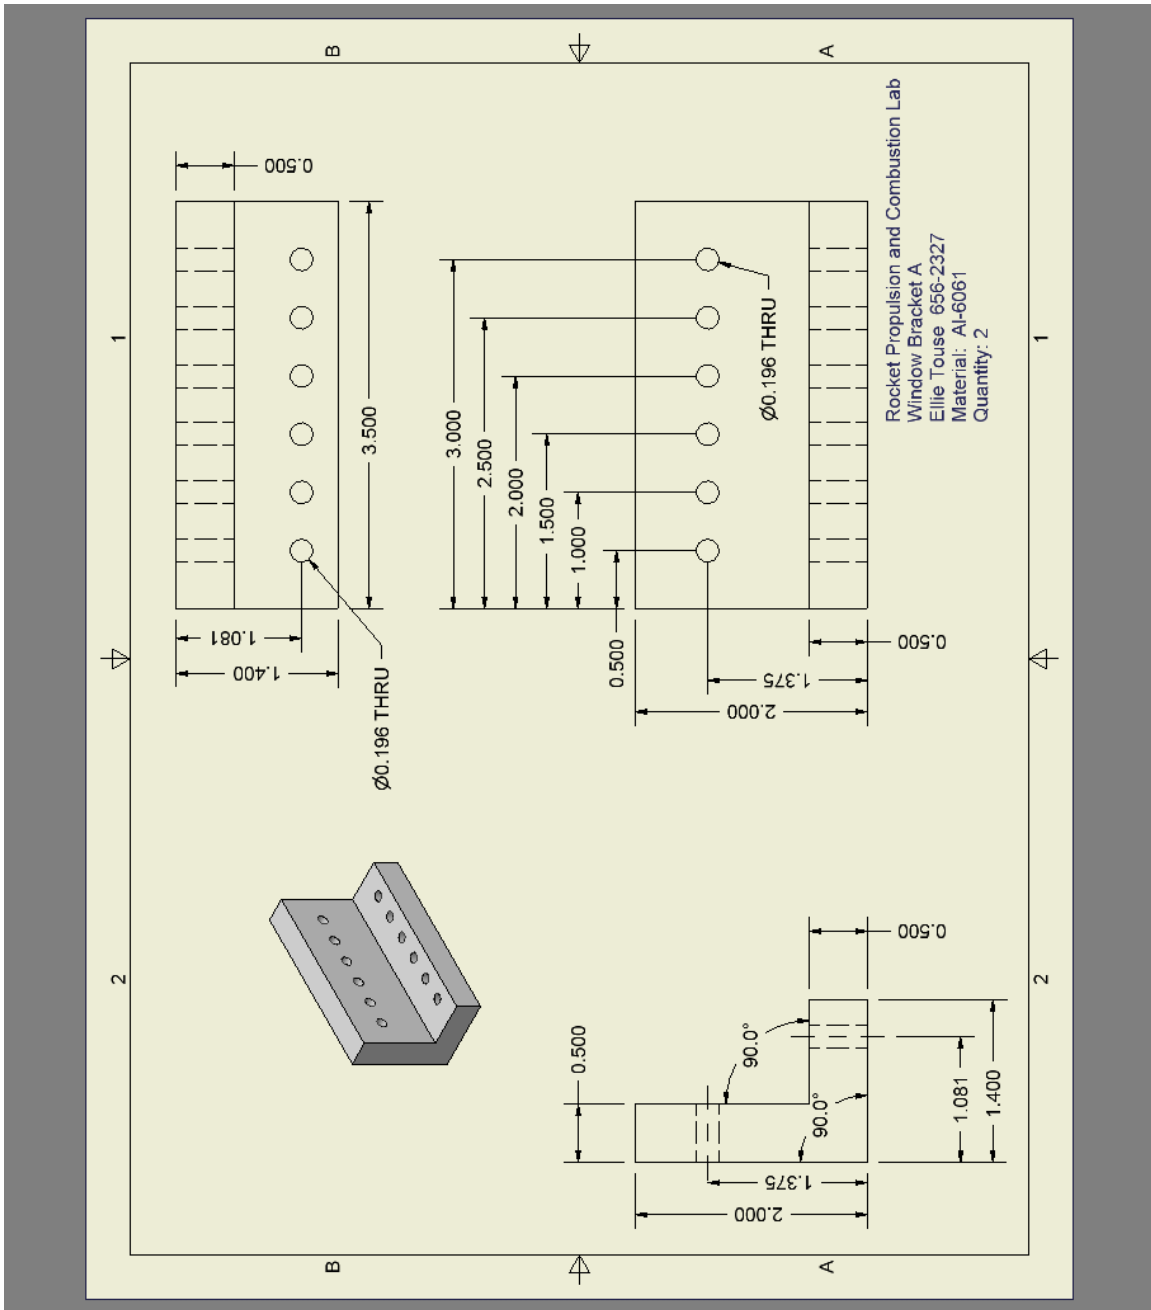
Support Bracket A for Injector Plate Frame used in Optical Section of Two-Dimensional Test Section
